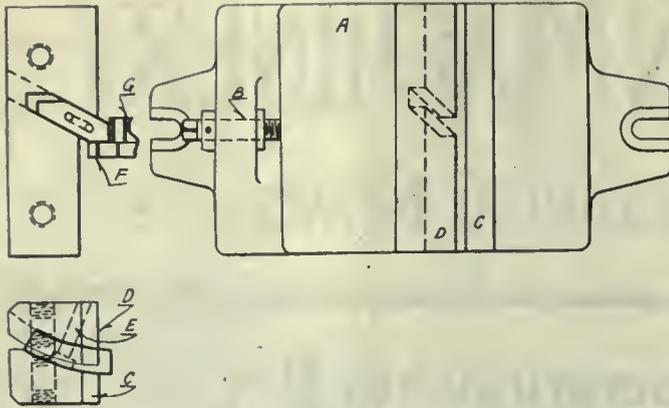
SHOWING VISE JAWS FOR MILLING ANGLE.
